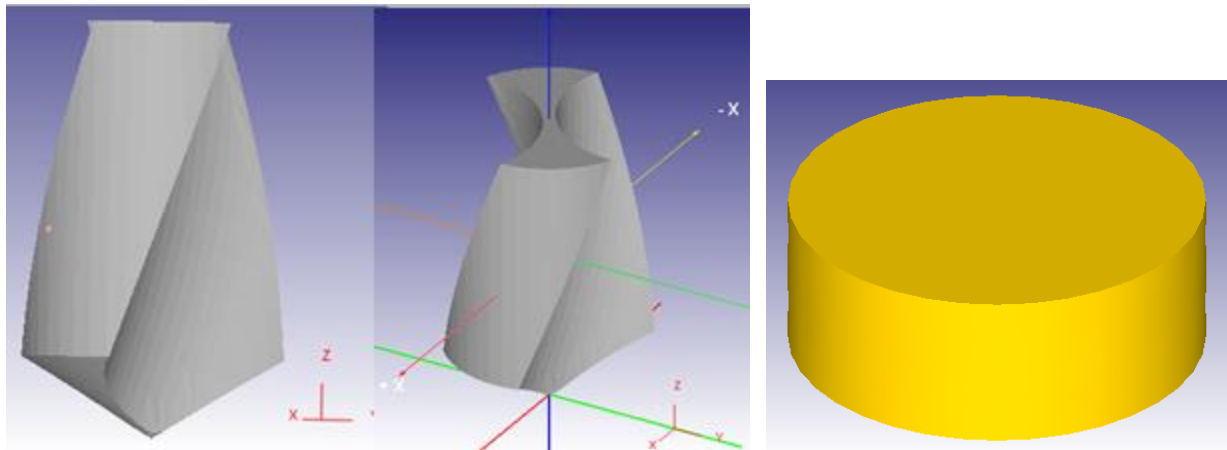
Drill bit and Workpiece imported in DEFORM 3D for drilling
